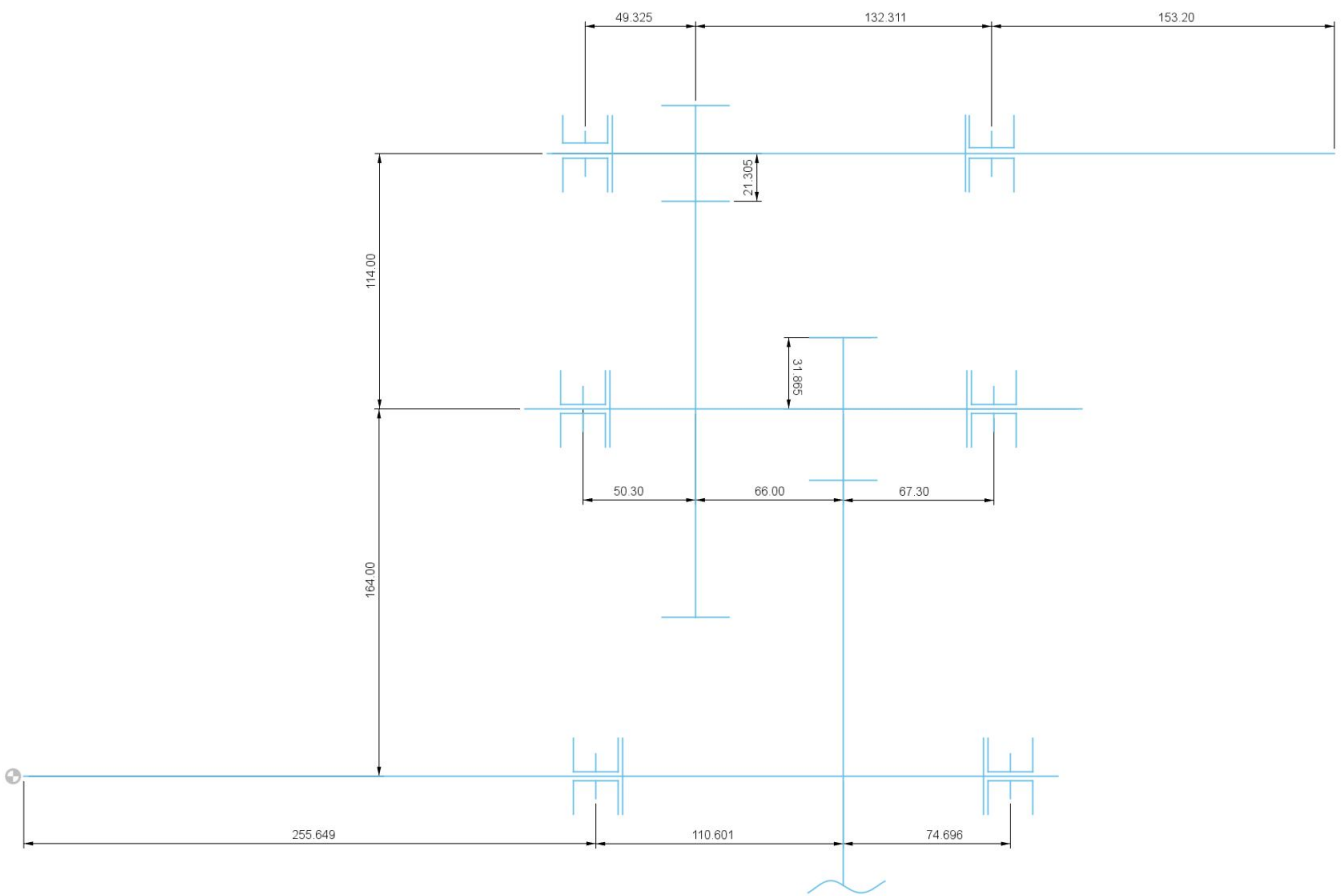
Gearbox Dimensions Typ SEW X2FS100e-H-B (Constructed by Tom Gundlach)
